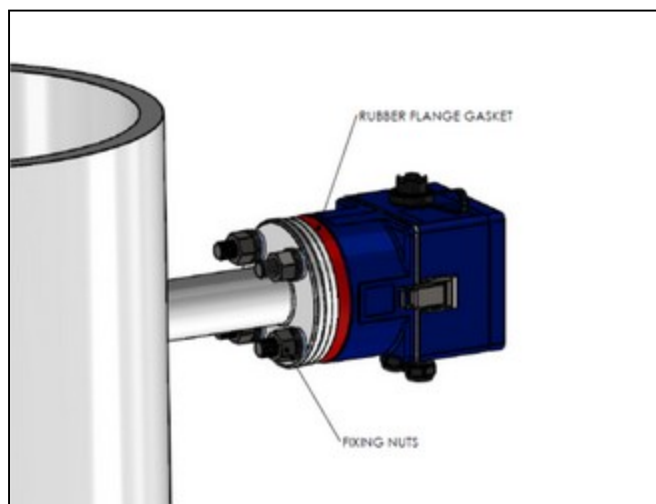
Air-Purge Body mounted to flange with the rubber flange gasket
